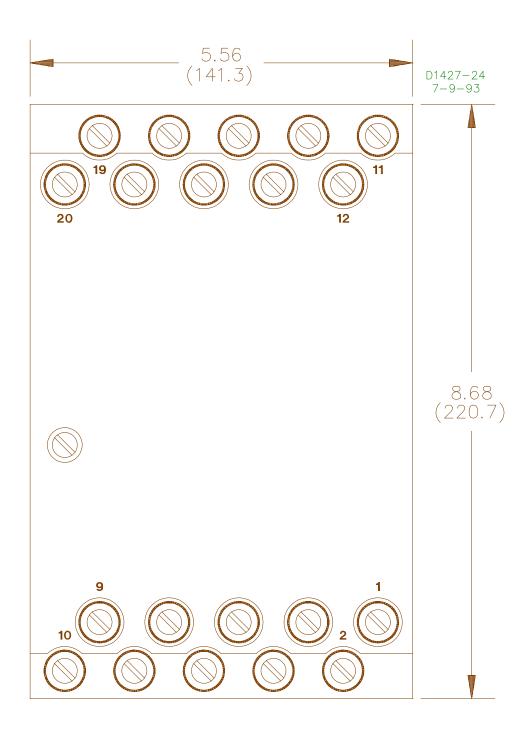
Semi-Flush Mounting, Outline Dimensions, Rear View
